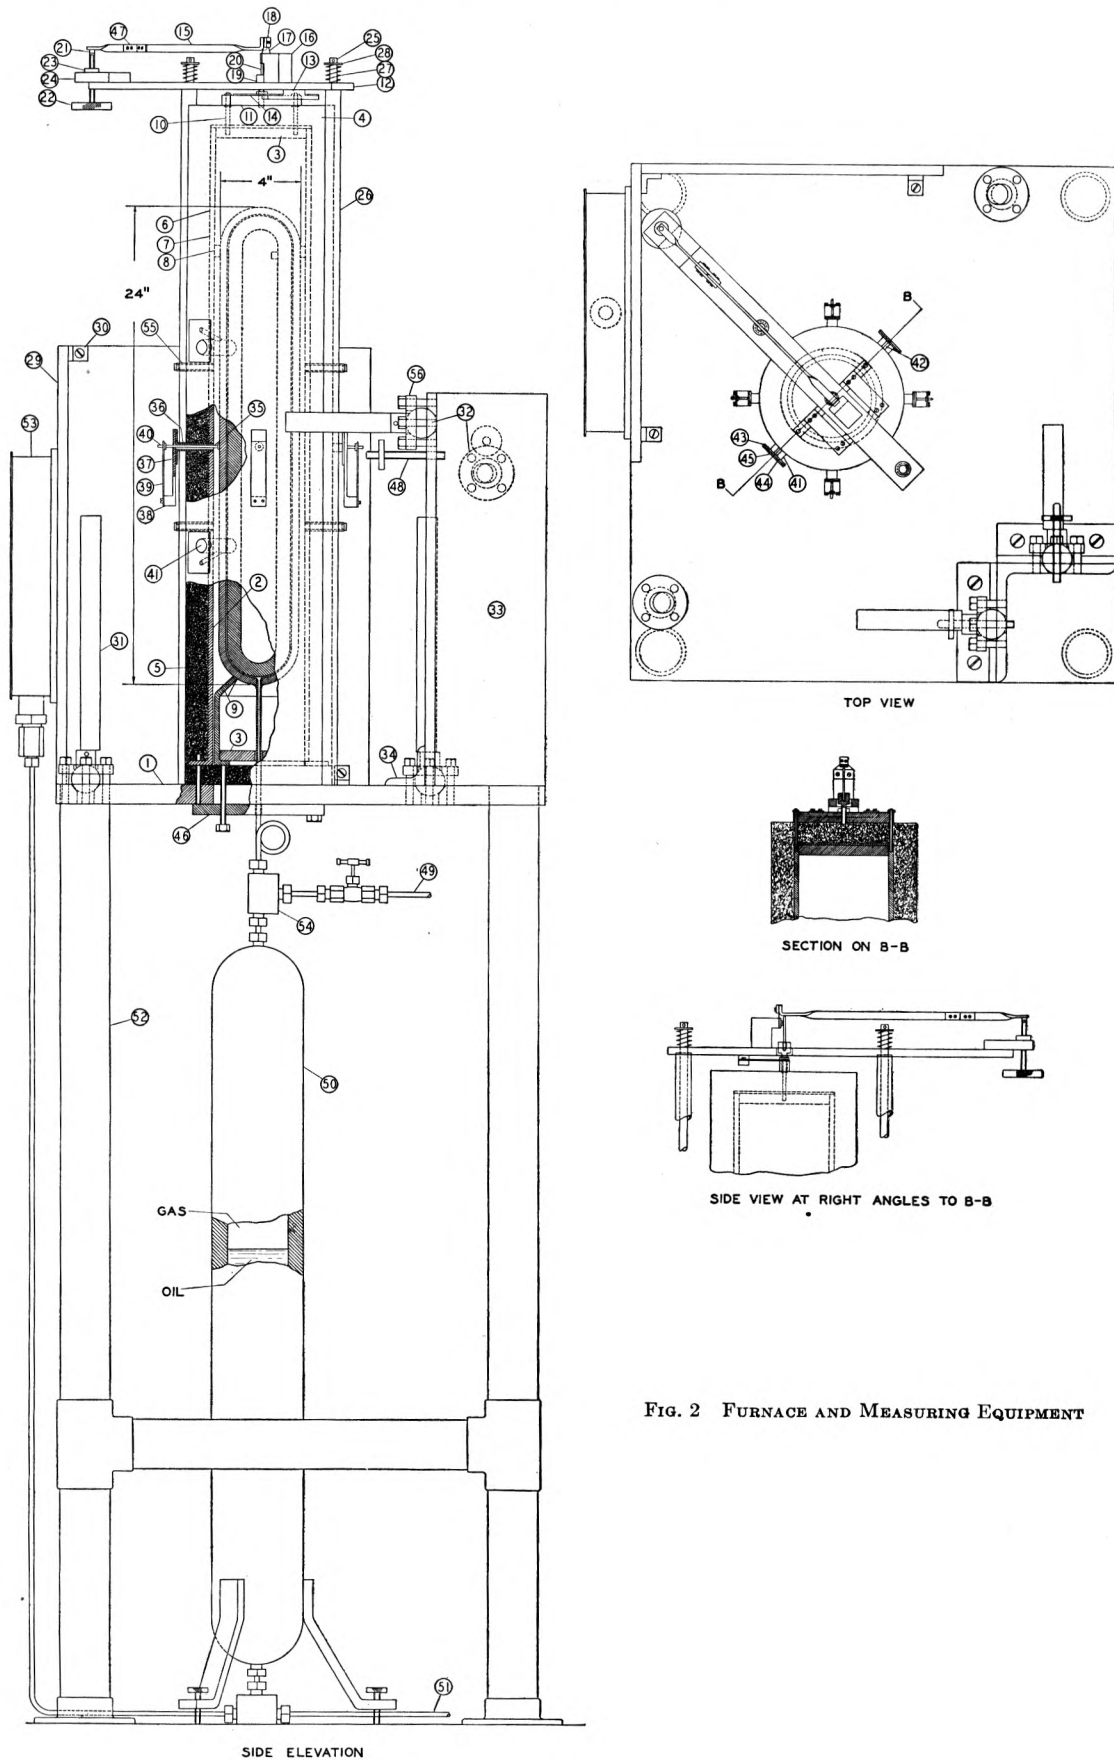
FURNACE AND MEASURING EQUIPMENT
